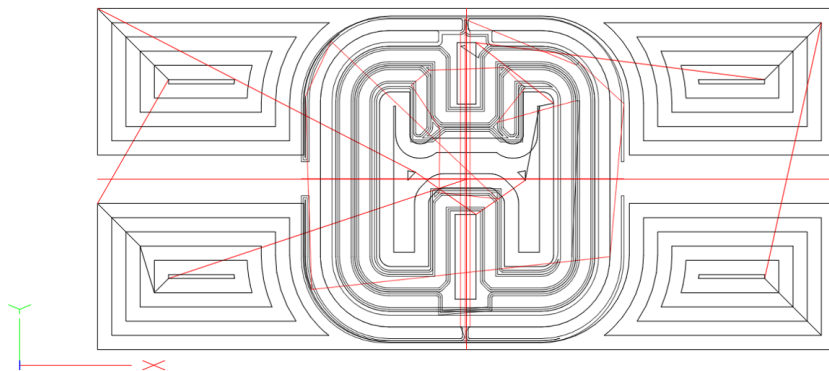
Case 3: micro milling tool paths for electronic circuit board microwave filter
